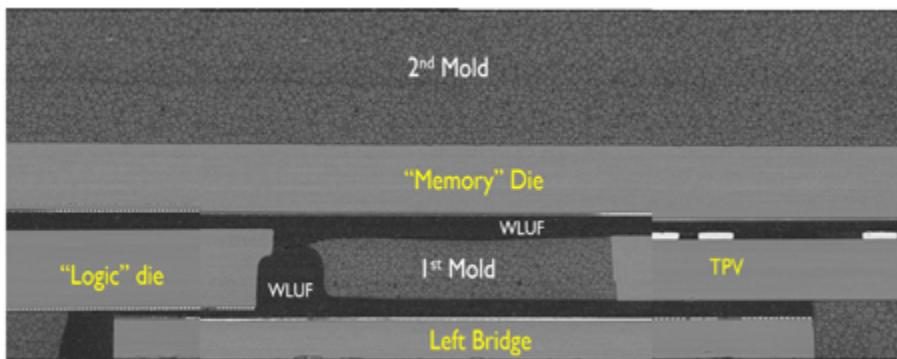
A cross section after flip-chip on a FOWLP package assembly and final, second wafer-level molding.
